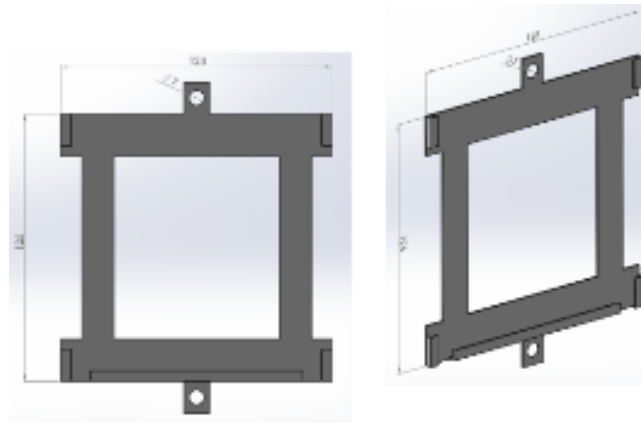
5 Detail design of the solar cell holder in Solidworks
